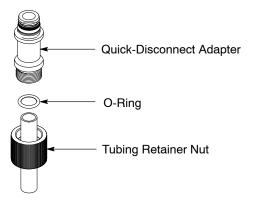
Installing Tubing into the Manifold Quick-Disconnect Adapter
